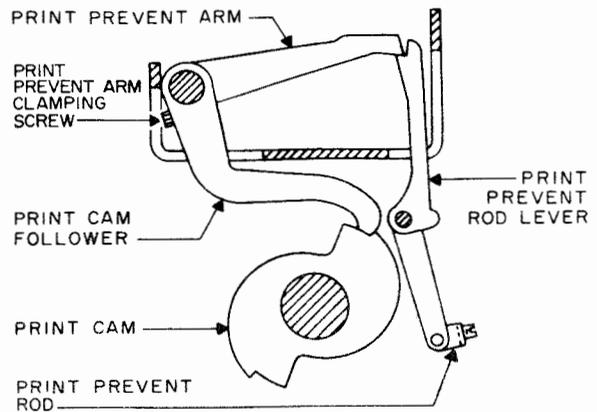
Print Prevent Arm Engaged With Print Prevent Rod Lever
